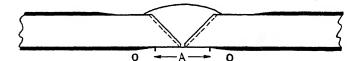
Cross-section of galvanized iron showing the effect of fusion welding.
